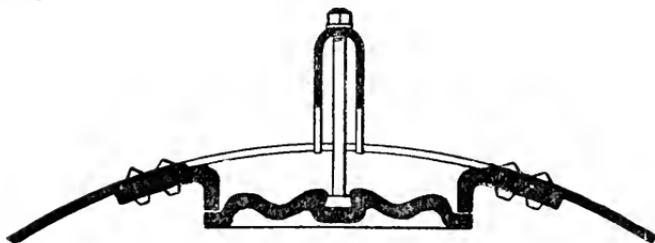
SECTION THROUGH THE FRAME SHOWN IN FIG. 6.
